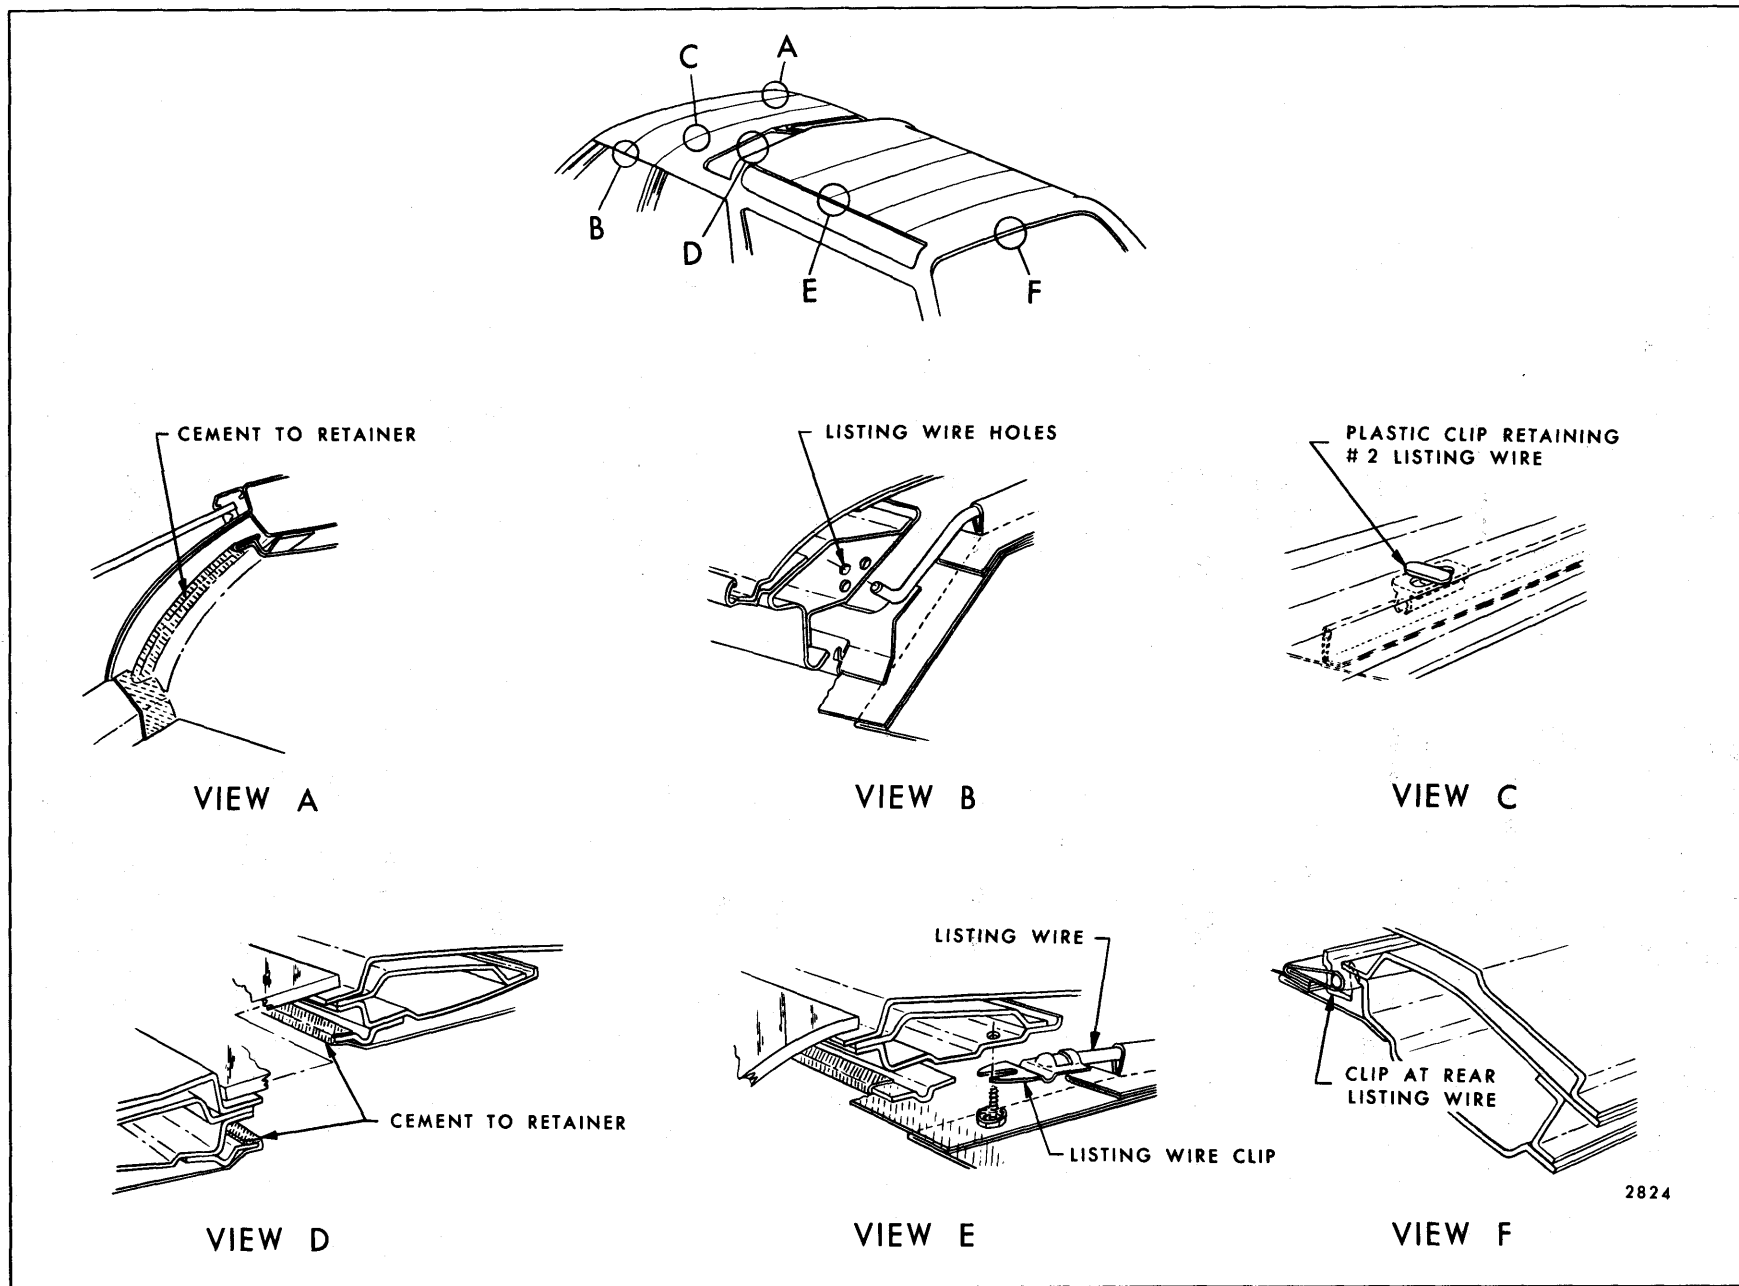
Headlining Installation - "55" and "65" Styles
